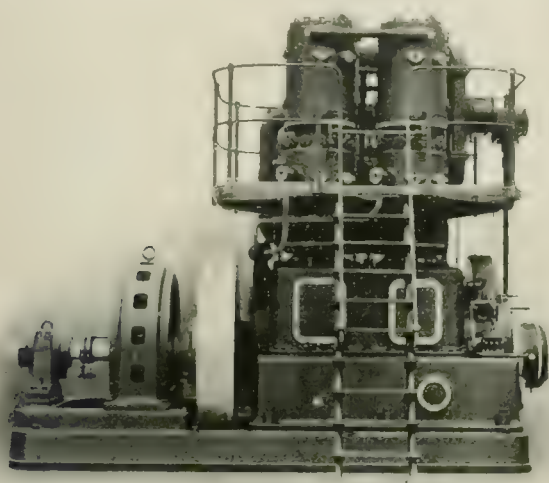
WESTINGHOUSE GAS ENGINE.
